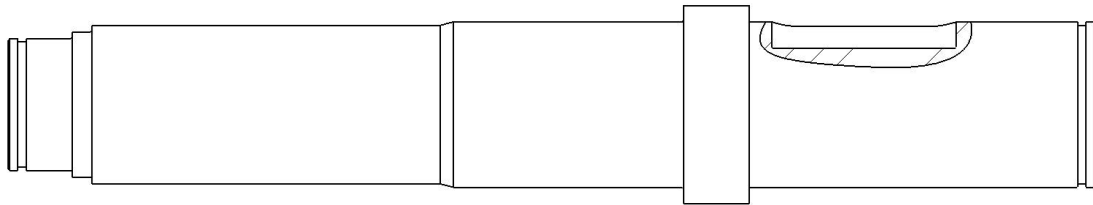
The final Shaft designed to fulfill the rigidity and fatigue criteria, and confine the gears and bearings
